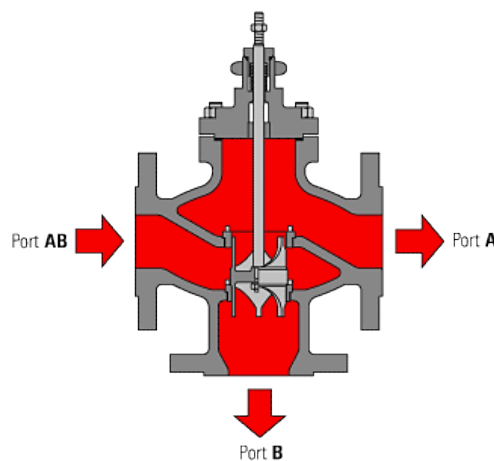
Three-port mixing valve used incorrectly as a diverting valve
